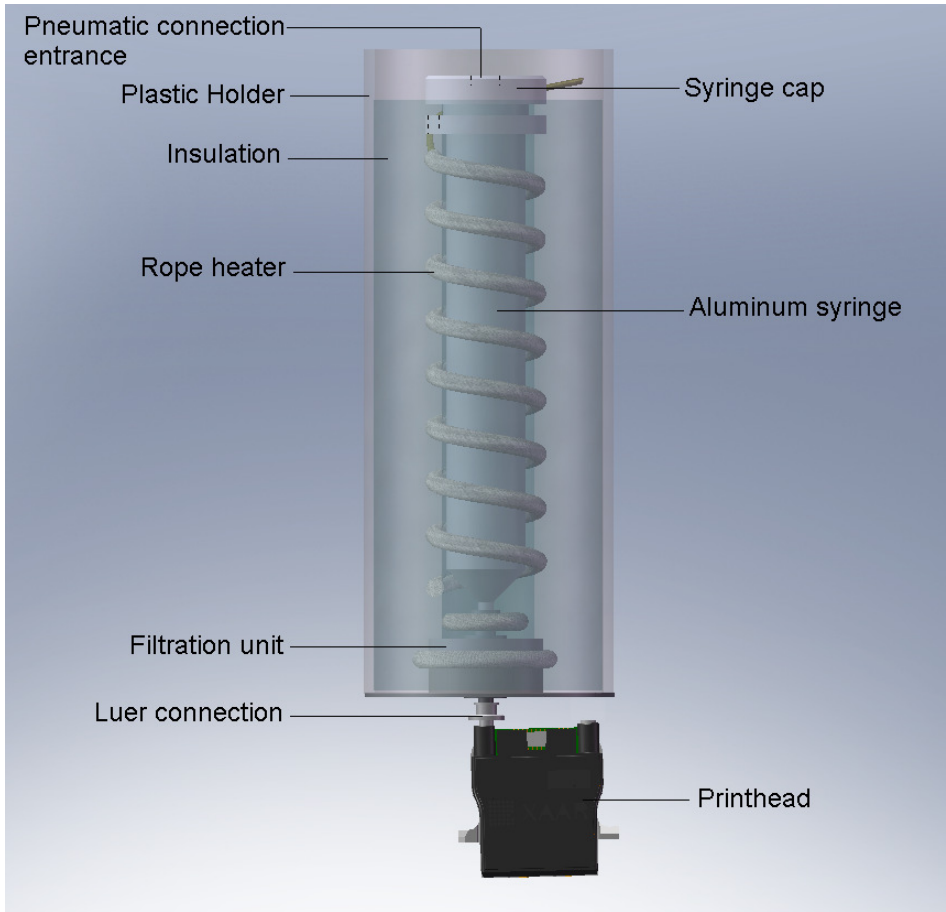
Melt supply unit with luer connection joined to the printhead
